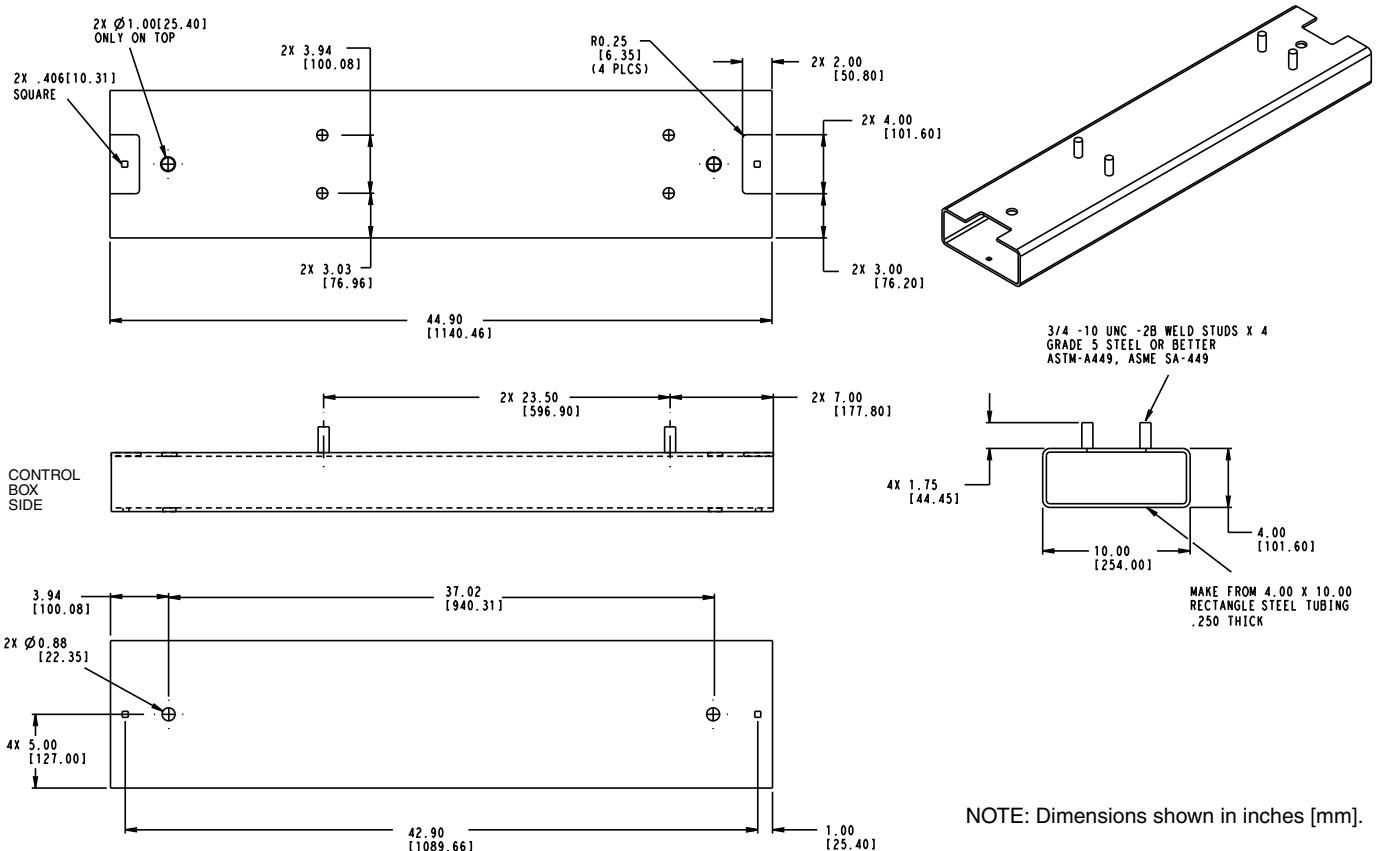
30XW150-200 Unit Mounting Feet Dimensions
